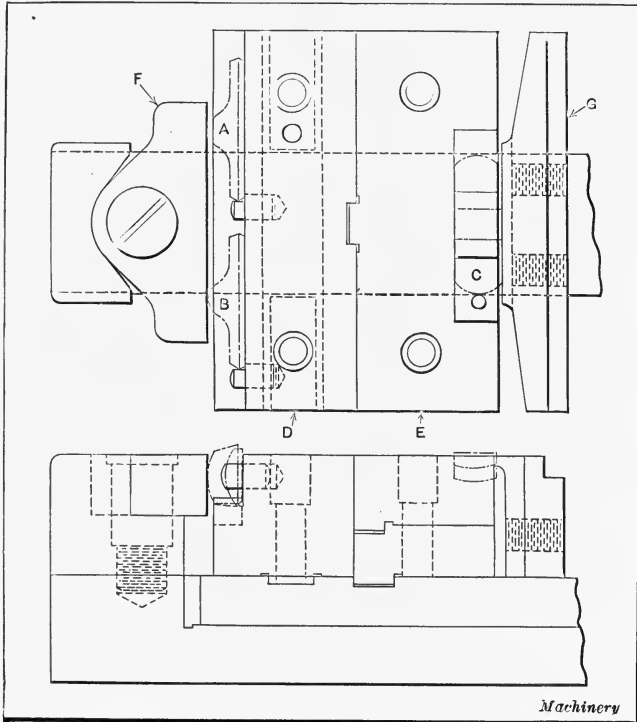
Assembly Drawing of the Milling Fixture illustrated in Fig. 6
